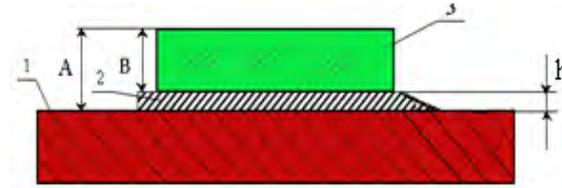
Chip mounting scheme: 1 – package, 2 – solder, 3 –chip.
